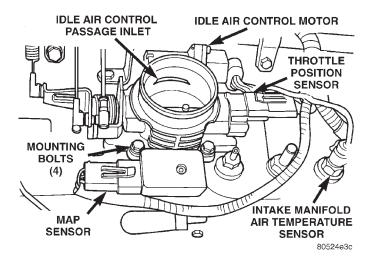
Intake Manifold Air Temperature Sensor— 4.0L Engine
